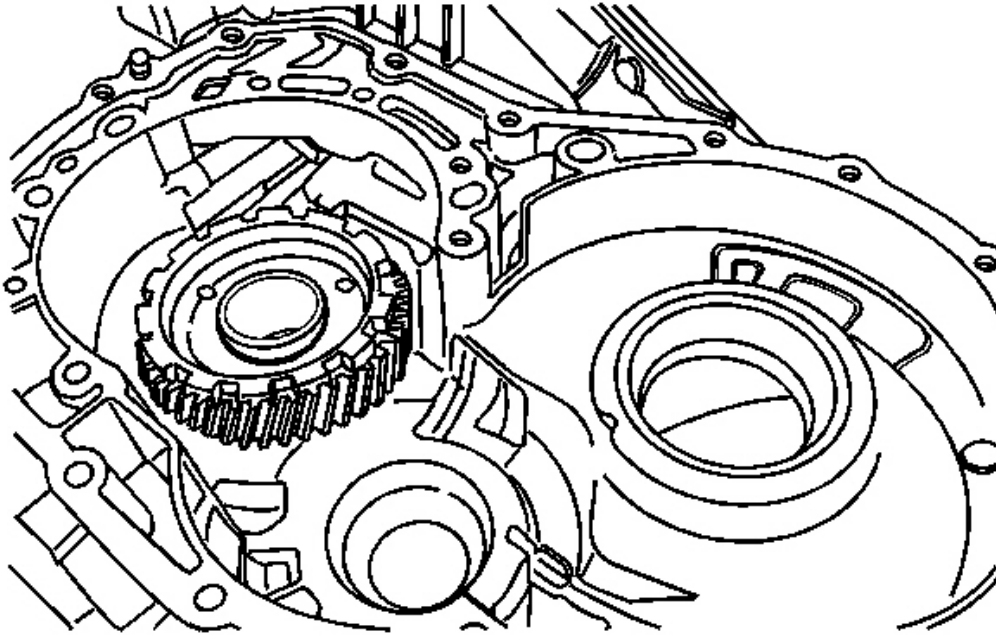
Counter Driven Gear Outer Tapered Roller Bearing Race & Shim
